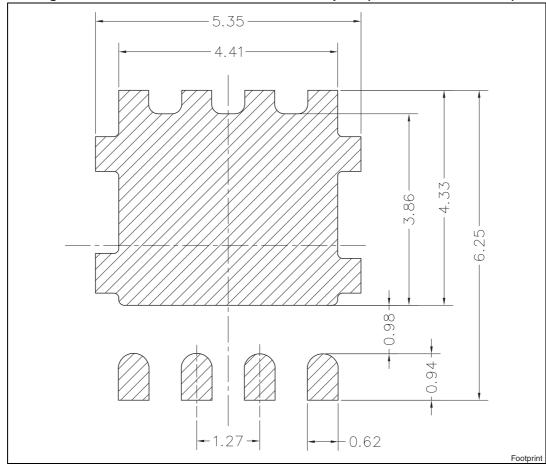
PowerFLAT™ 5x6 recommended footprint (dimensions are in mm)
